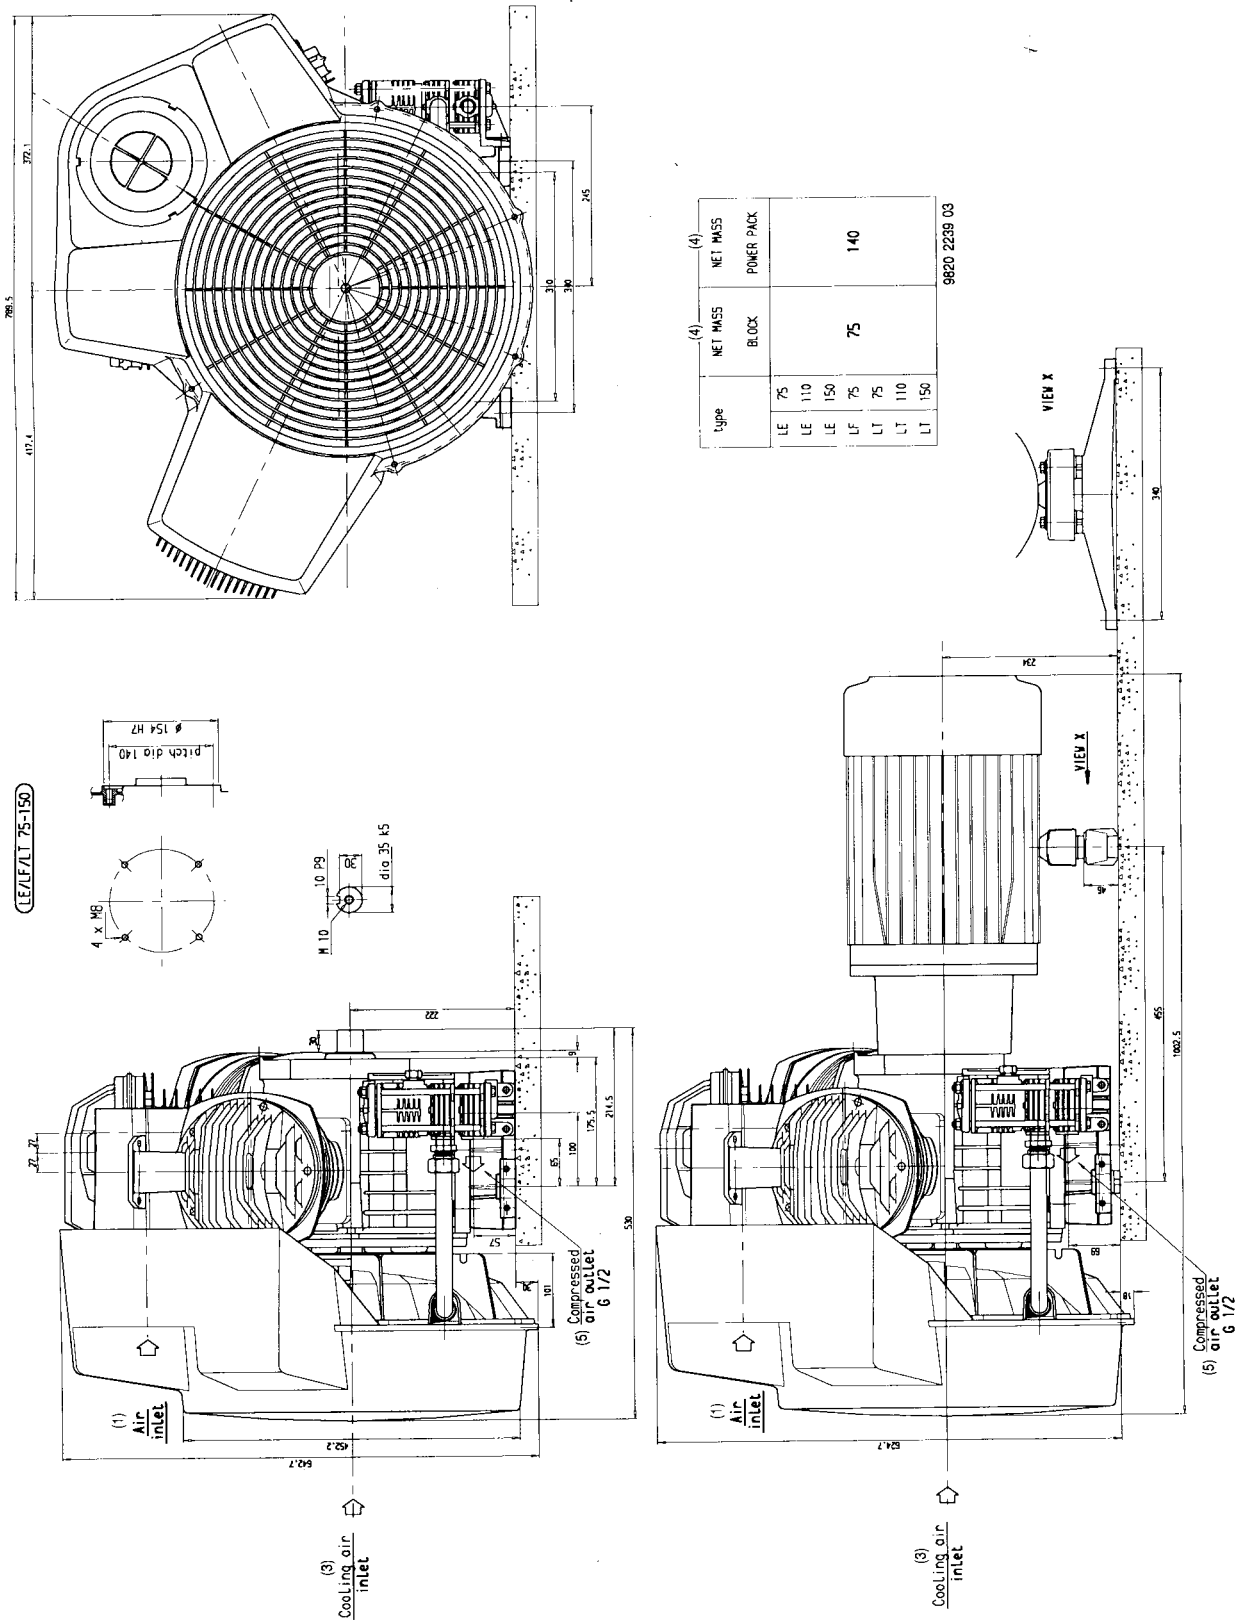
Dimension drawing, LE/LT75 up to -150 and LF75 Power Pack
